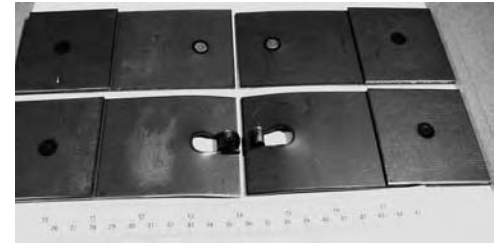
Photograph showing the two types of weld fracture commonly observed in weld shear-tension tests. Source: Ref 10 with permission
